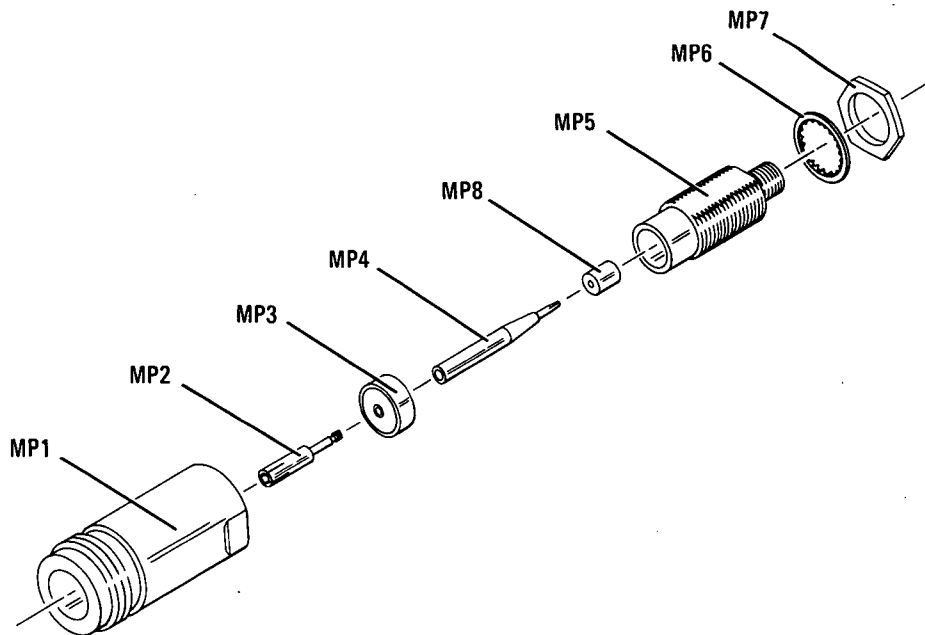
INPUT 50 Ohm Connector J1, Exploded View
